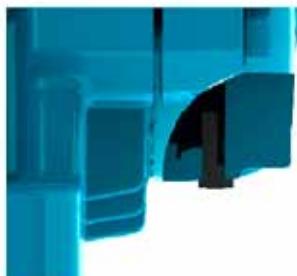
Detail of the rubber drain plug mounted in closed position
